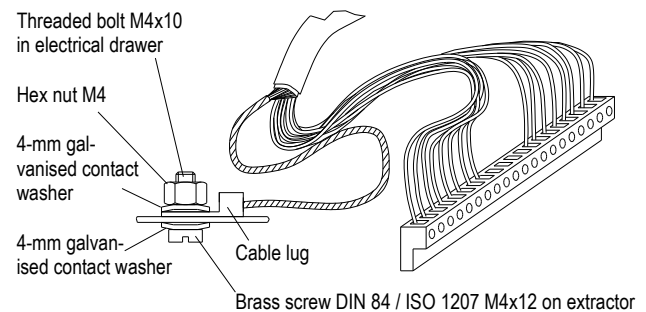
Shielding in the electrical drawer and on the extractor with spiral cable
